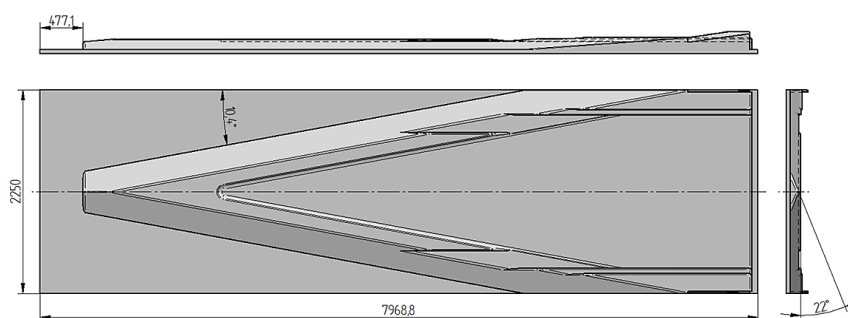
Wedge tools used for rolling a railcar axle from a rectangular billet
